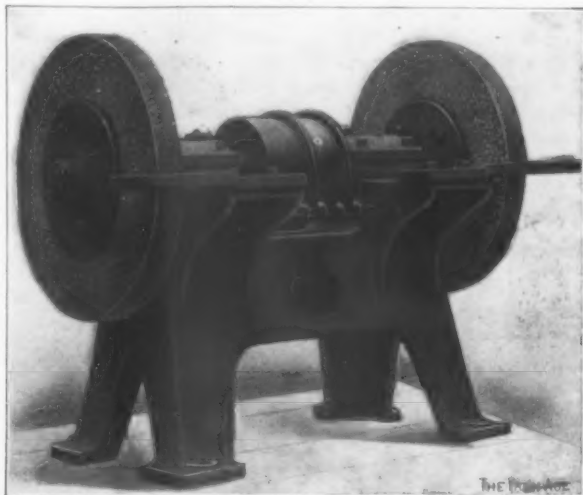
A Heavy Double Floor Grinder for Dry Grinding.
